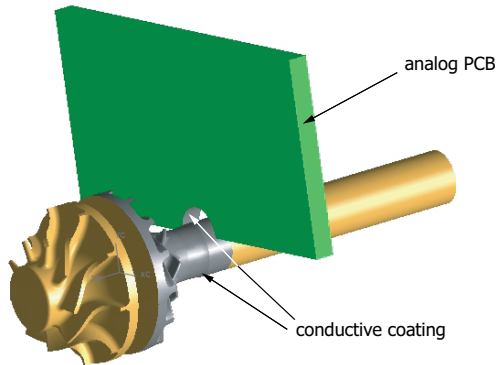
Exploded view of the rotor group and the analog PCB with the semicircular cut-out forming the coupling capacitor. The inner face of the cut-out as well as the concentrically arranged rotor shaft are conductively coated. The diameter of the shaft is 4mm.
